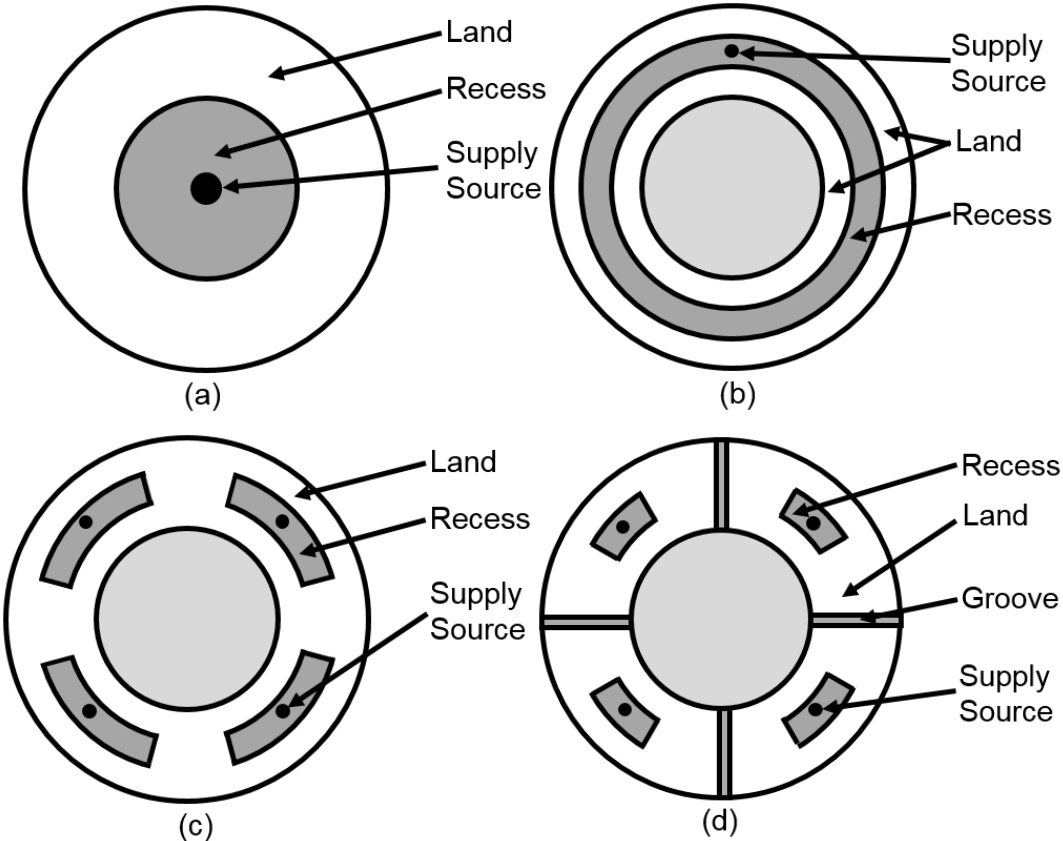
Common recess geometries in HTBs, including: (a) single circular recess thrust bearing, (b) annular groove thrust bearing, (c) annular multi-recess thrust bearing, and (d) multi-pad thrust bearing.
